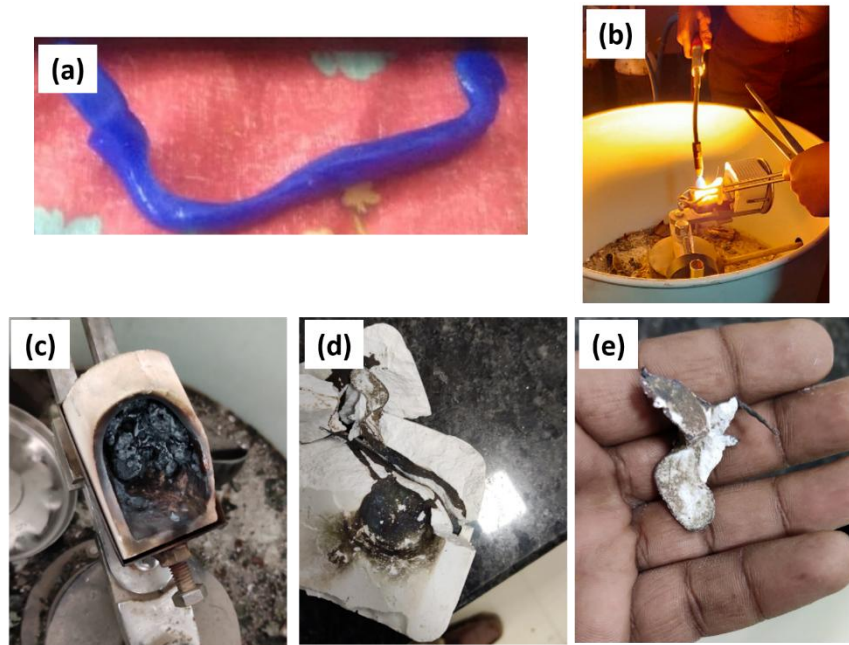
(a) wax pattern, (b) investment casting, (c) image after molten metal pouring into cavity (d) opening of cavity (e) final failed part
